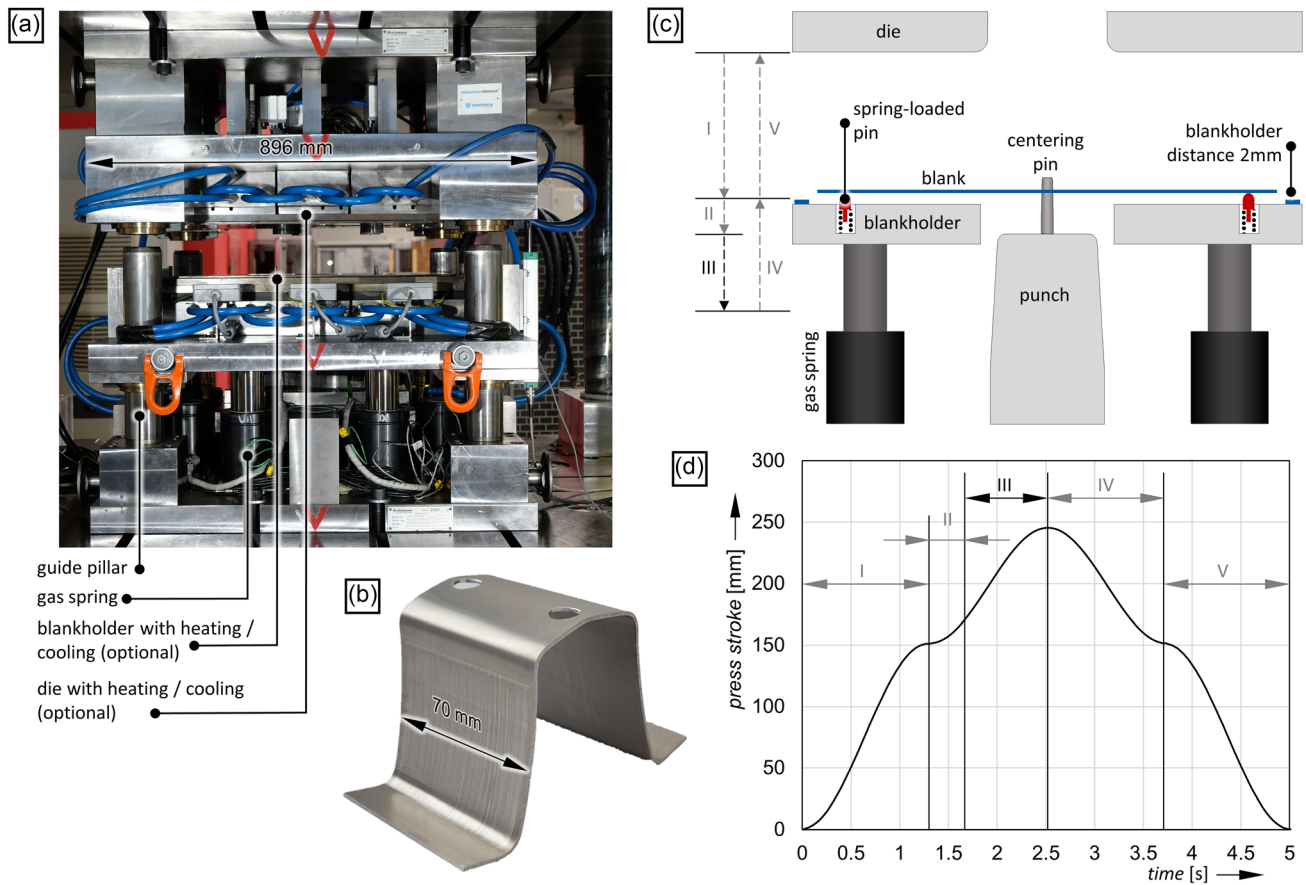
a) Multipurpose forming tool as photo, b) formed part, c) forming tool as schematic, d) press stroke in the forming trials with (I) die closure, (II) idle stroke, (III) forming (75 mm), (IV) return stroke, and (V) die opening.
